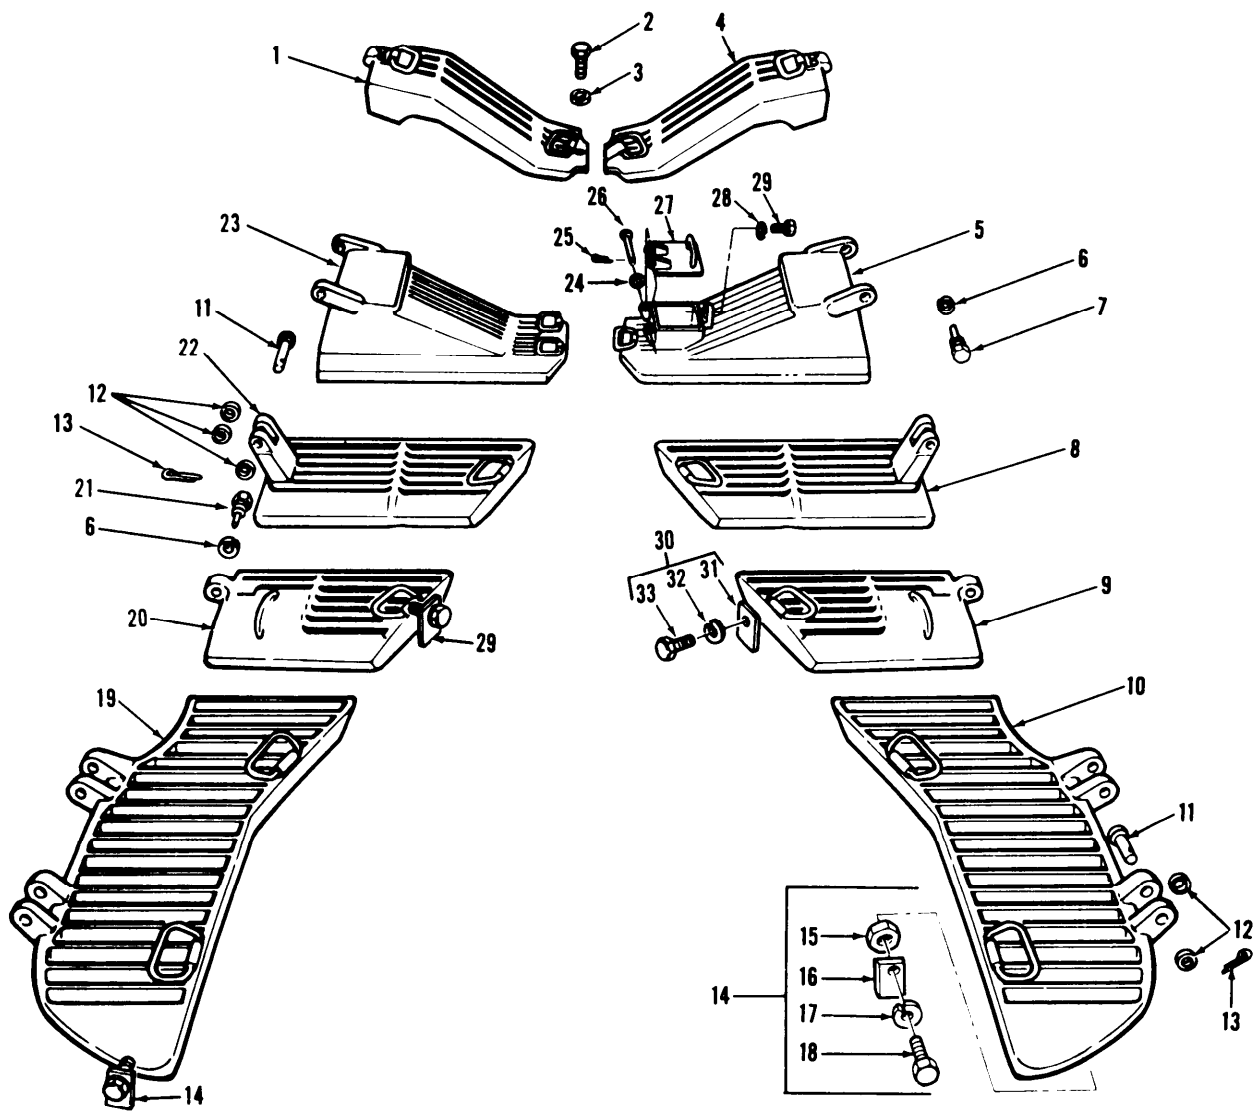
GRILLE DOOR ASSEMBLIES AND RELATED PARTS.
